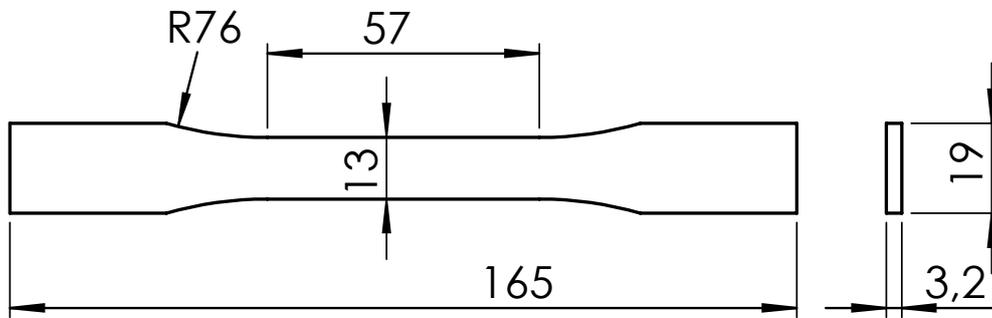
Technical Drawing of the tension test body printed in many configurations. Measures in mm
